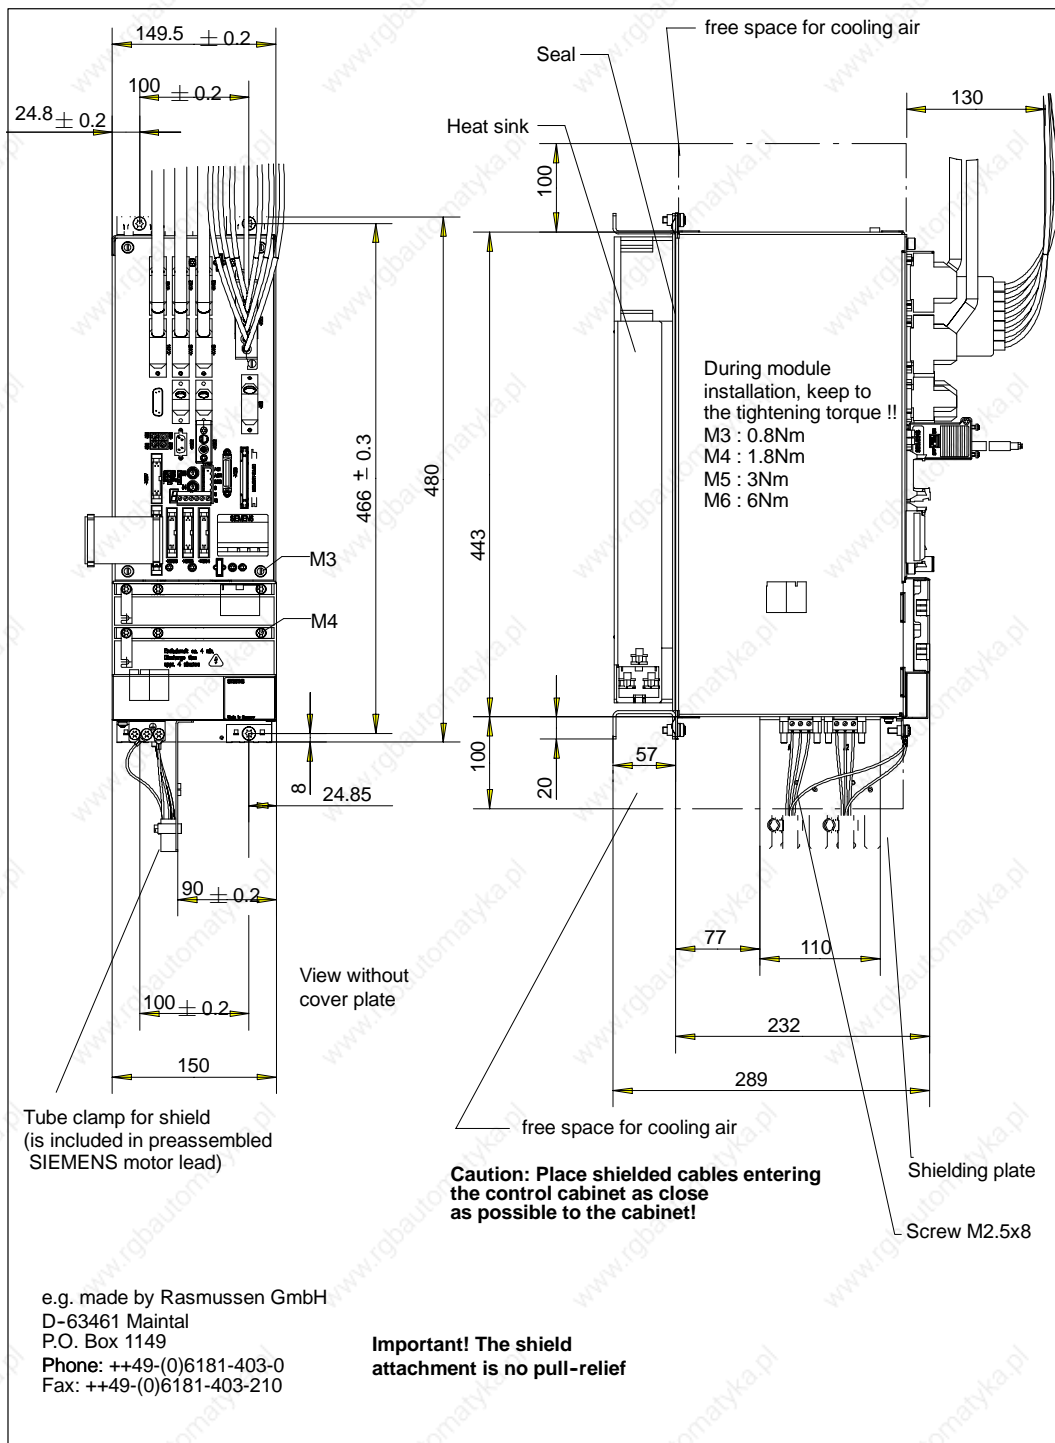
Dimension drawing of the 2-axis CCU box
